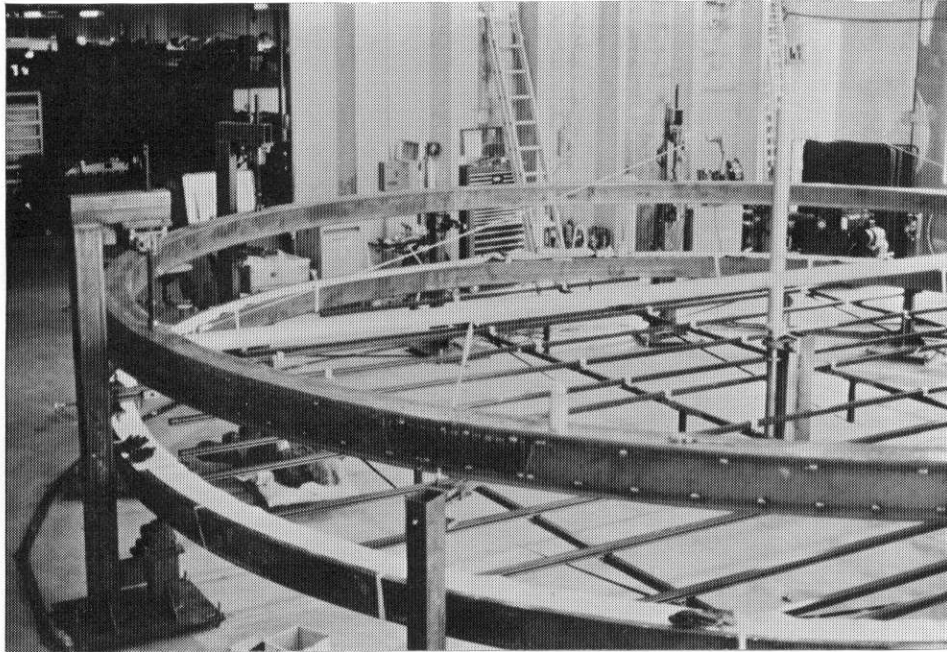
Mirror-Module Assembly and Tensioning Tooling Setup at Sandia's CRTF Assembly Building. Visible are upper and lower moveable tensioning reaction rings, heliostat ring support pylons, lay-out table support framework, and central rotating sweep arms.
